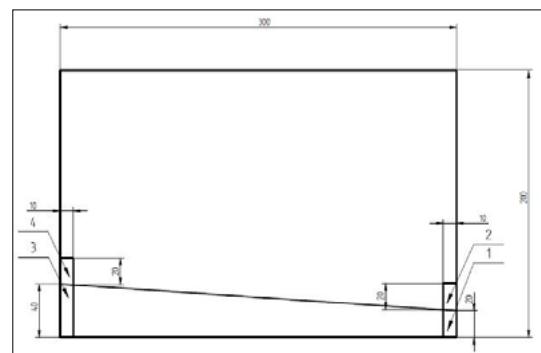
Layout of the test plate showing the cut edge and the positions of the test specimens.
